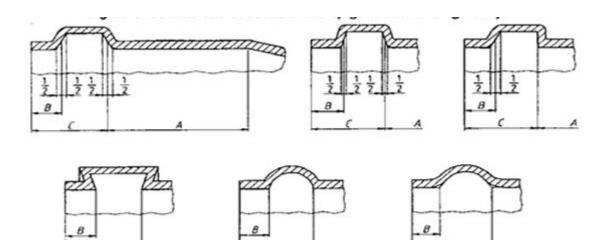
TYPICAL GROOVE DESIGNS FOR RING SEAL SOCKETS
